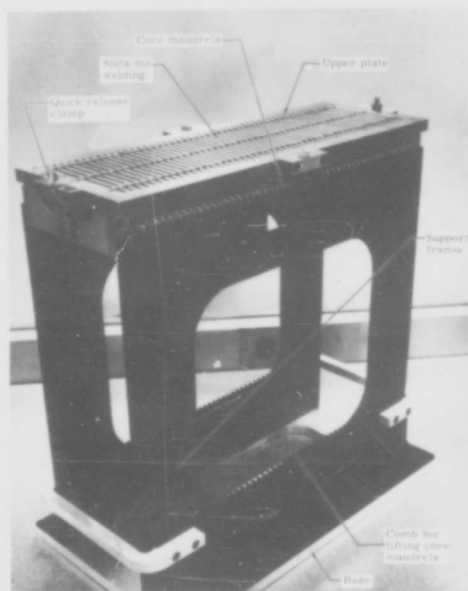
Electron Beam Weld Tools for Honeycomb Core
